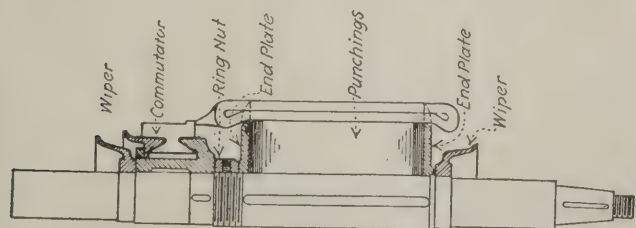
IRON BUILT ON SHAFT NUT ON COMMUTATOR END
